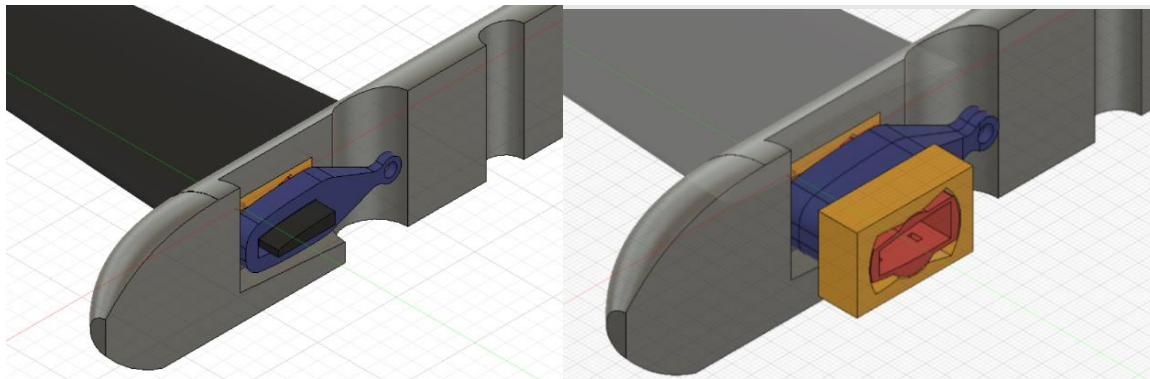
Cross section of the torpedo showing the bearing system in the torpedo, which allows the rotations of the wings, taken from Fusion 360
